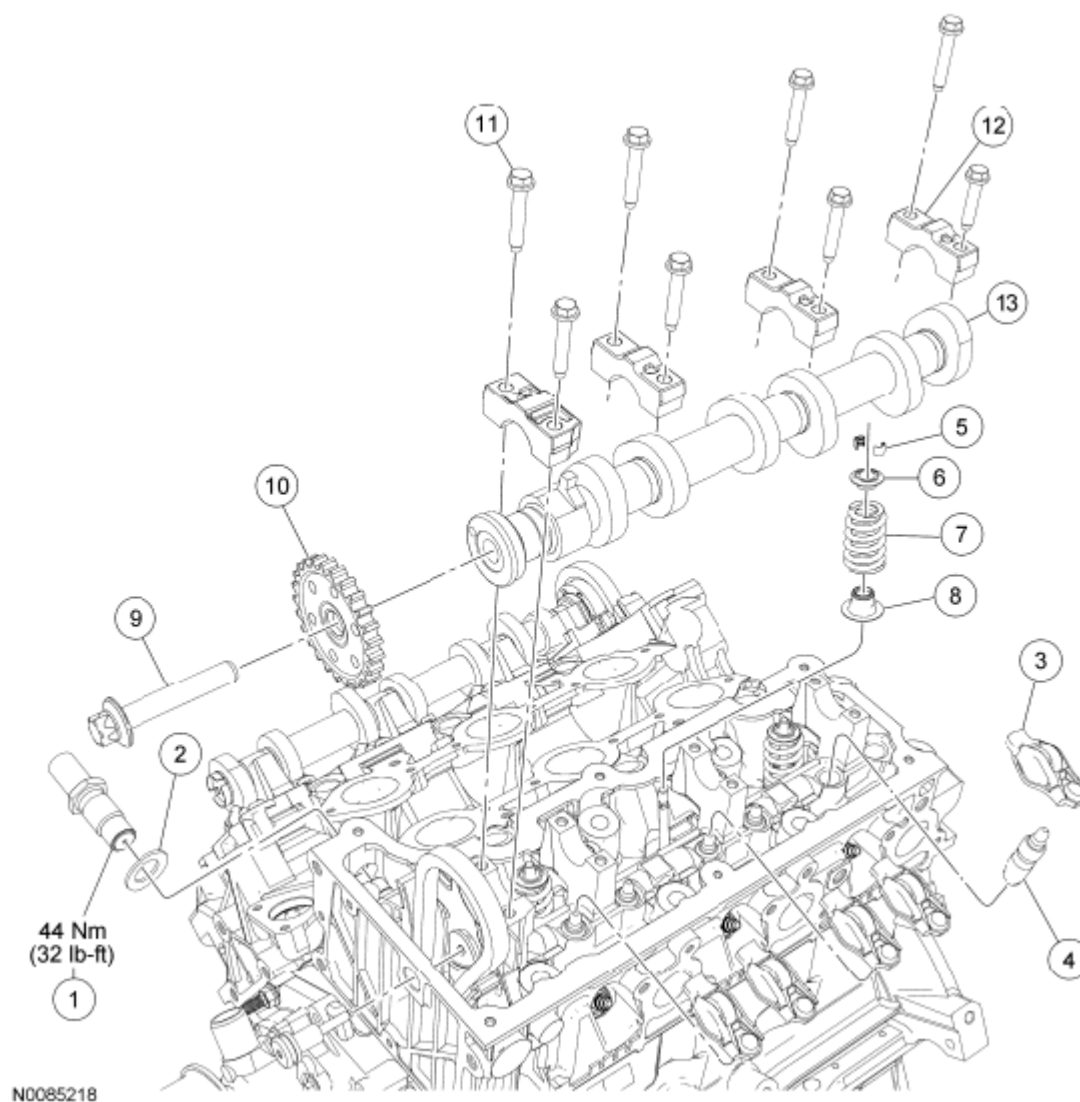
Identifying LH Valve Train Components With Torque Specifications
